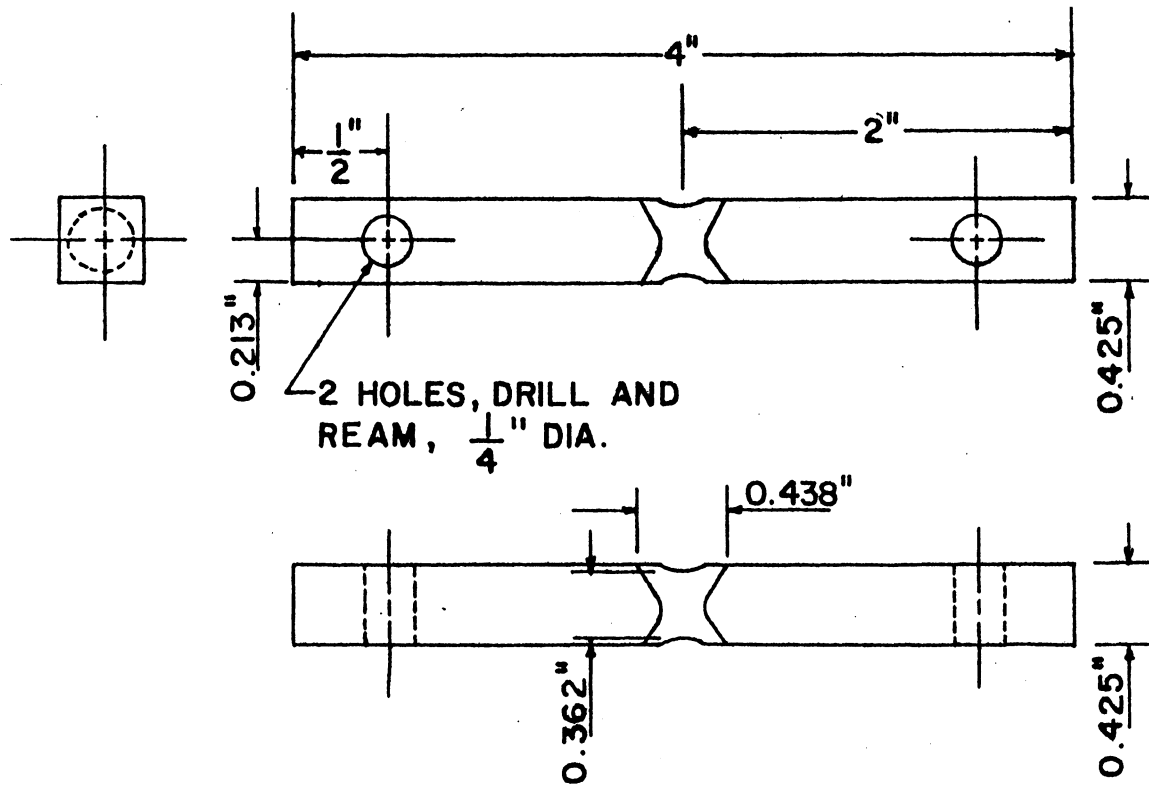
SPECIMEN DIMENSIONS - SERIES B
